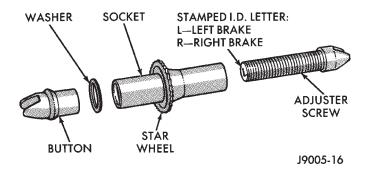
Adjuster Screw Components (9-Inch Brake) DRUM BRAKE ADJUSTMENT
